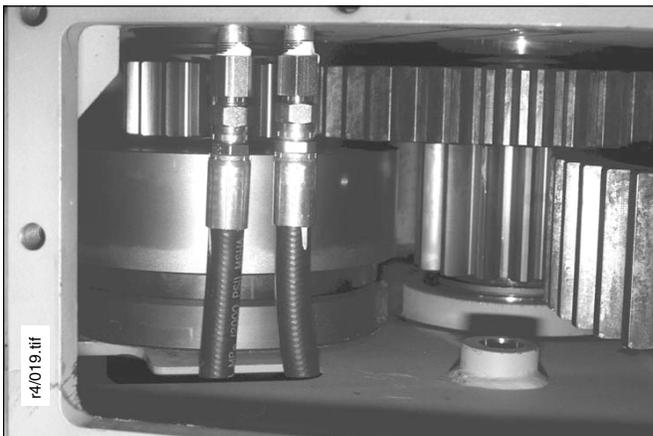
shows the location of clutch shaft components. Removal of the clutch shaft and associated parts can usually be accomplished with the winch mounted on the tractor. Prior to removal of the clutch shaft, perform the following:
